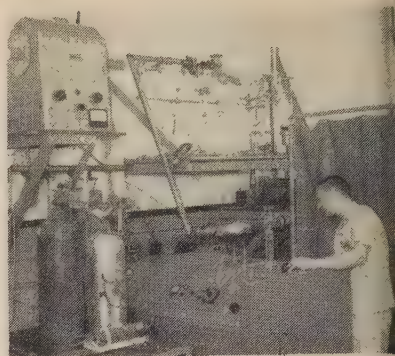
Inexpensive glass-walled retorts can be used for lab vacuum brazing tests.
